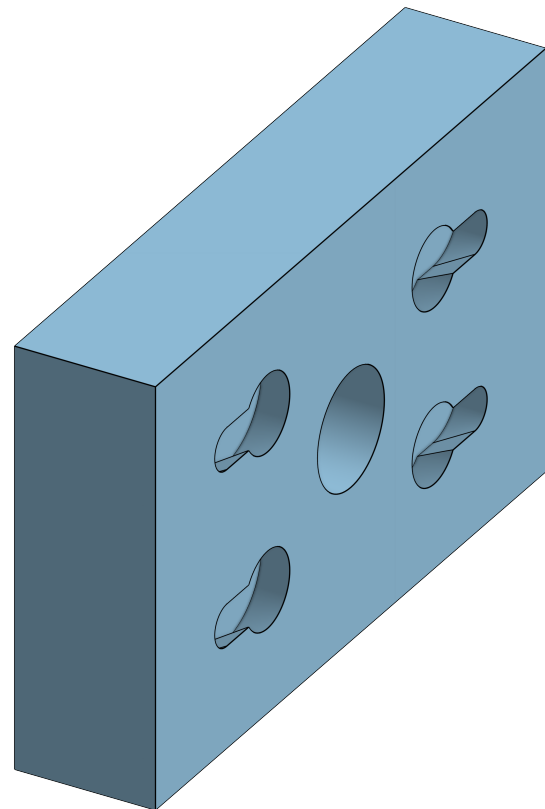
3D printed adapter used to connect the vacuum assembly to the robotic arm via M6 and M4 interface.
